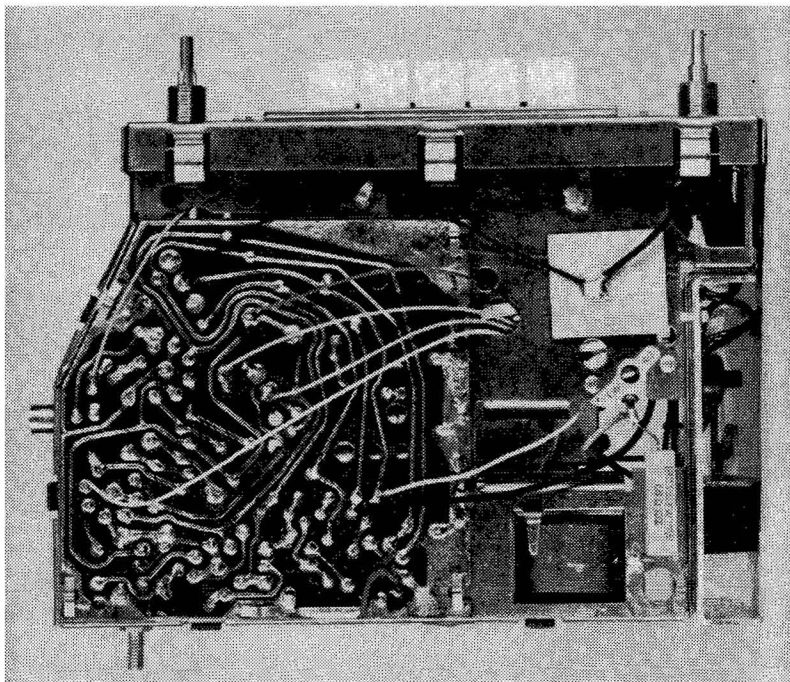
Below chassis photograph of the receiver shown in Fig. 6-5.
